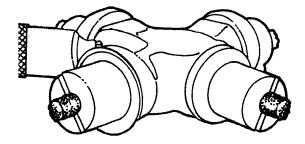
Pack Cross Journal Cavities With Grease Before Assembly
